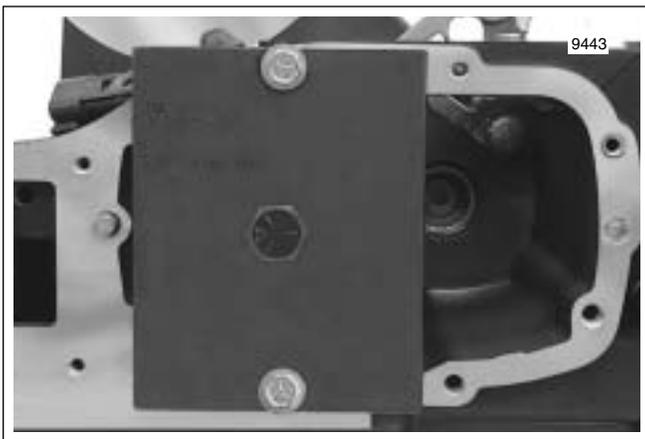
Main Drive Gear Bearing Installation (Right Side)
